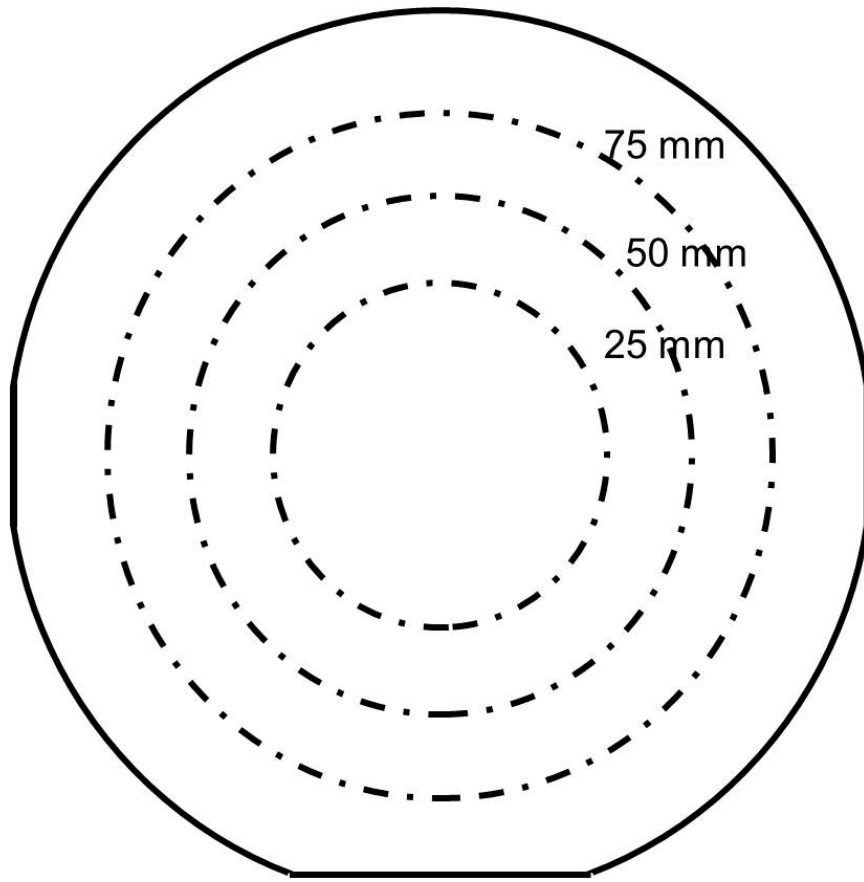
Outline of mold insert showing flat surfaces and 25, 50, and 75 mm circles.
